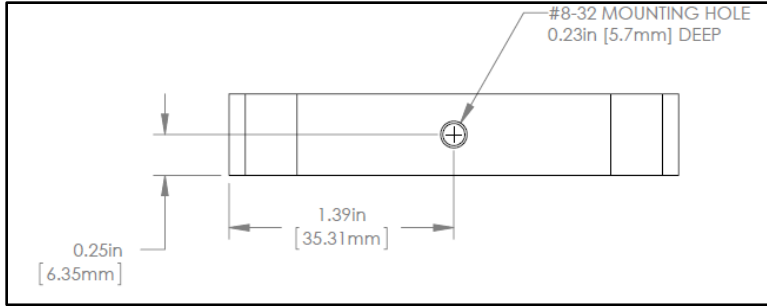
Thor Labs LCP02 - 60mm Cage Plate Adapter Drawing B [53]
